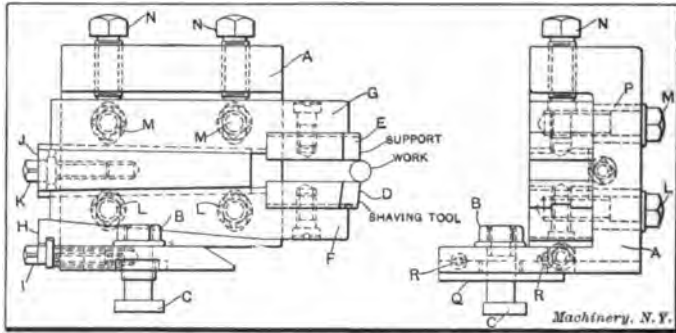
Shaving-tool Holder which can be used for a Wide Range of Work
